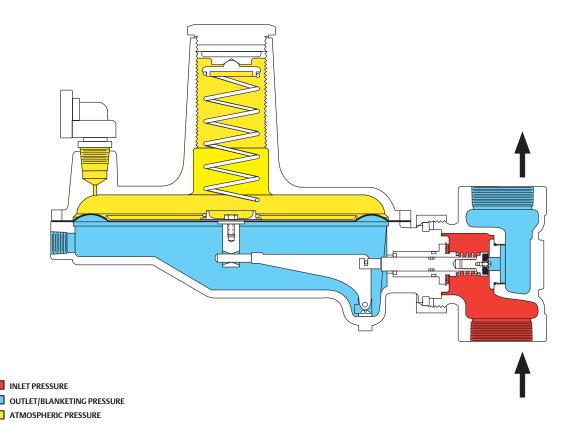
Fisher Type Y693 Tank Blanketing Regulator
